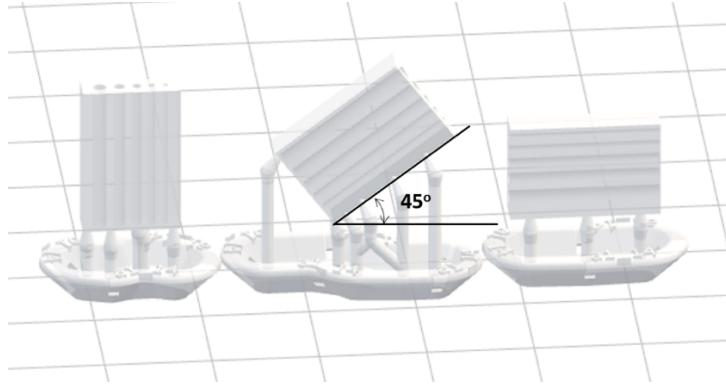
Study C parts prepared for fabrication on PreForm. The parts have channels of 1.2, 1, 0.8, 0.6 and 0.4 and were fabricated at 90°, 45° and 0° to the build plate. The part dimension is 3x9x14mm.
